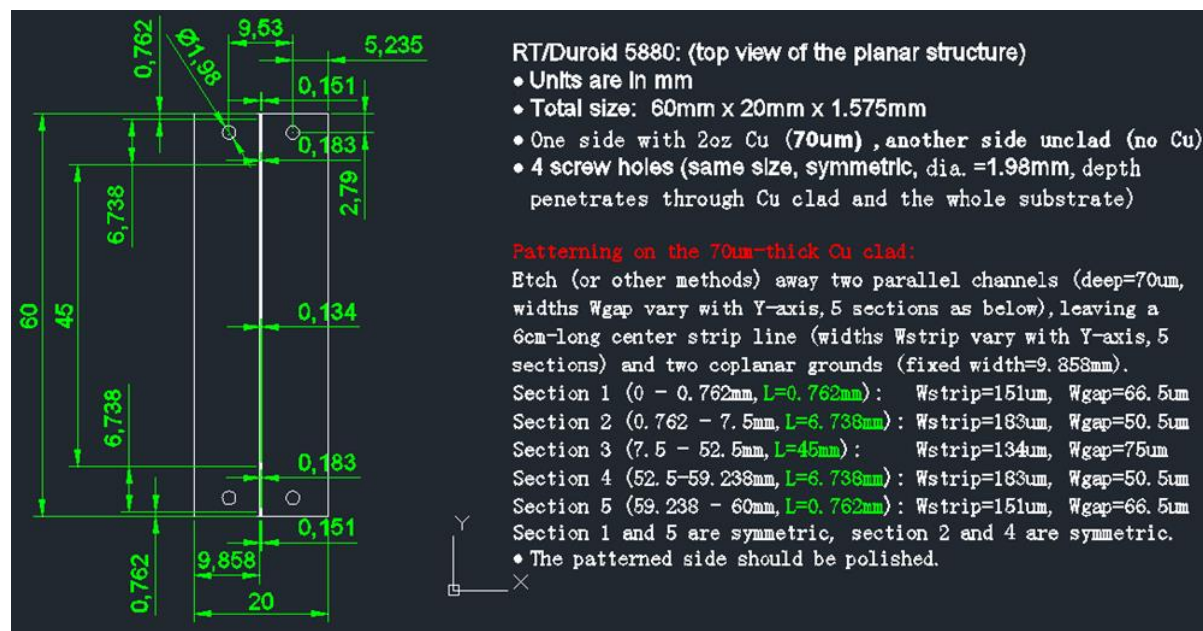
Top Plan View of the 2oz-Cu PCB Design with Size Annotation
